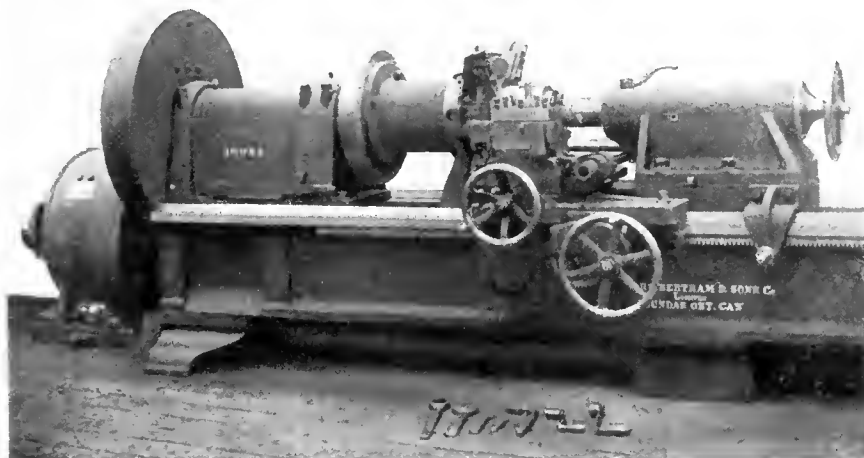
LATHE SPECIALLY EQUIPPED FOR MACHINING GROOVE FOR COPPER-DRIVING BAND.
